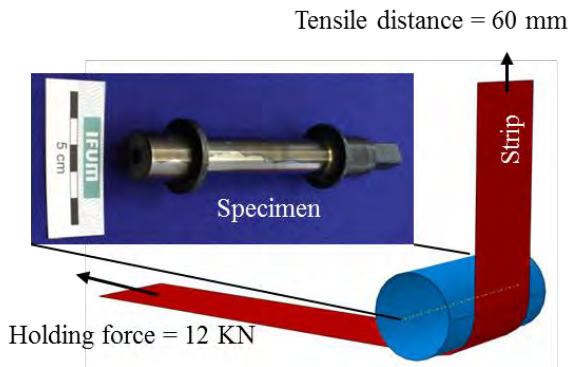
Testing concept to determine the friction coefficient with cylindrical wear-specimens (strip drawing with redirection)
